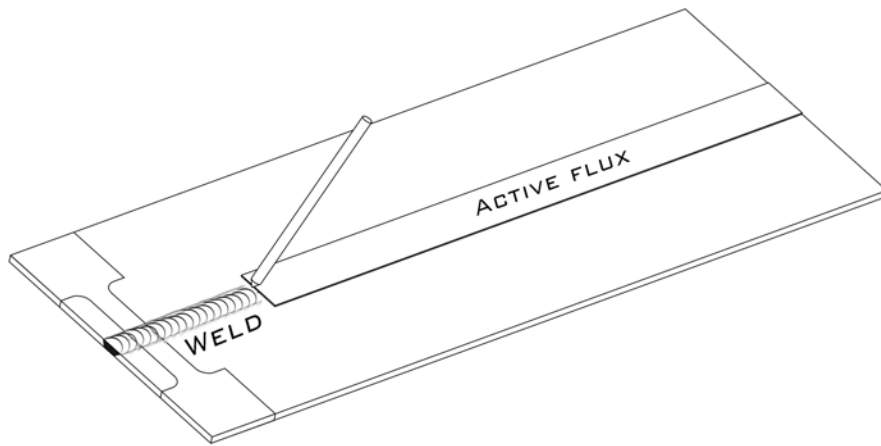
Weld diagram shows the welding procedure and location of the tensile samples taken.
